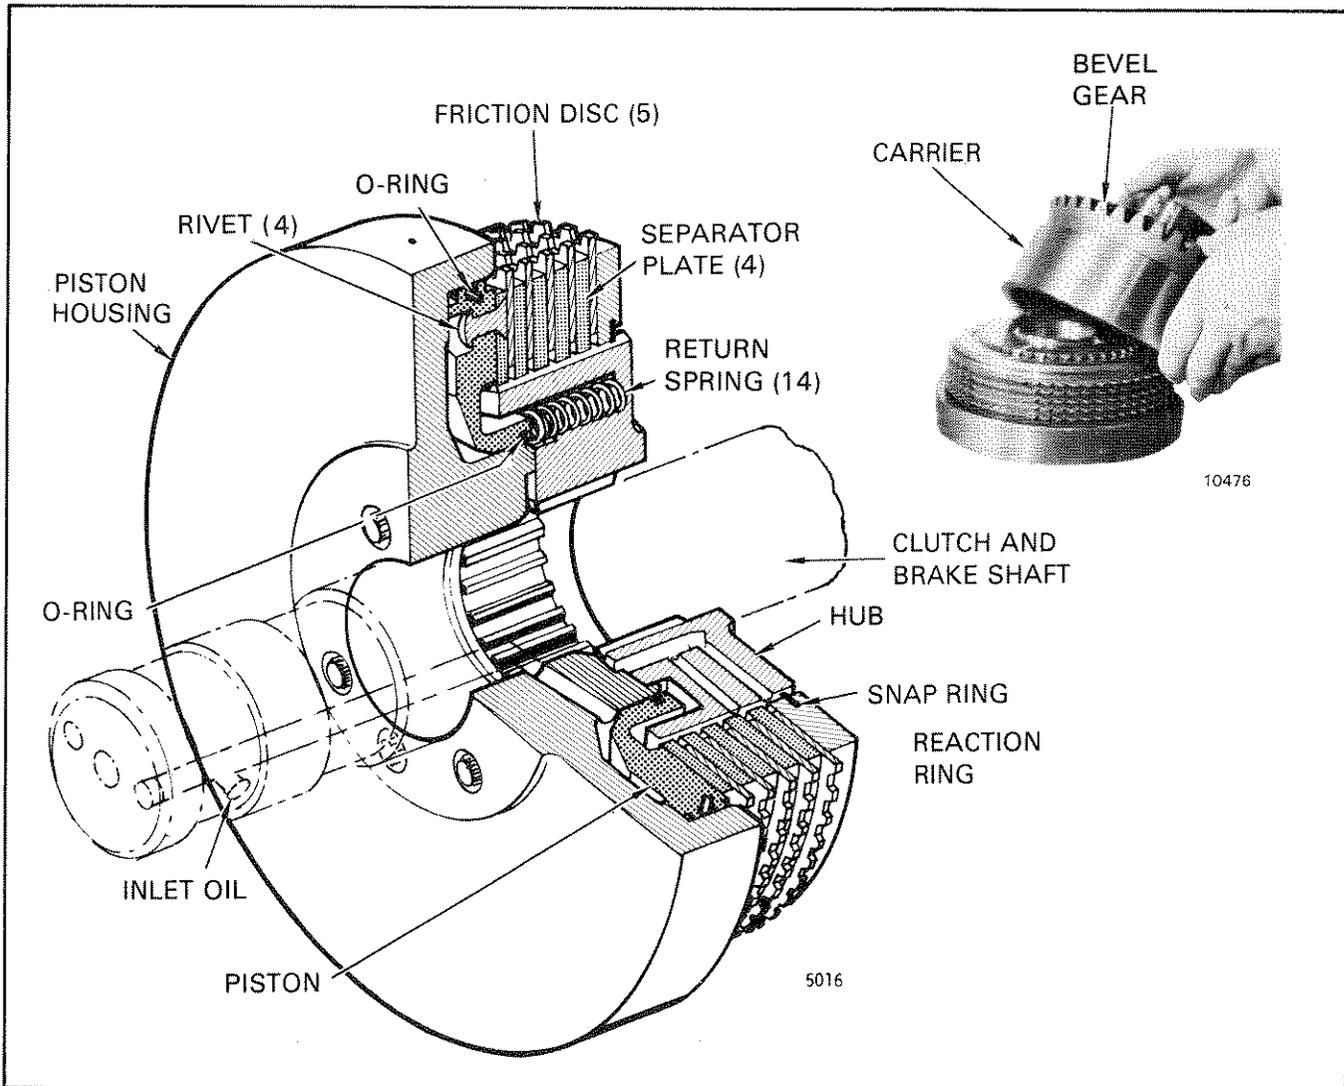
OIL CLUTCH ASSEMBLY
